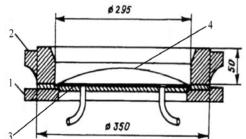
1 - base plate; 2 - clamping ring; 3 - specimen; 4 – specimen surface during test.
